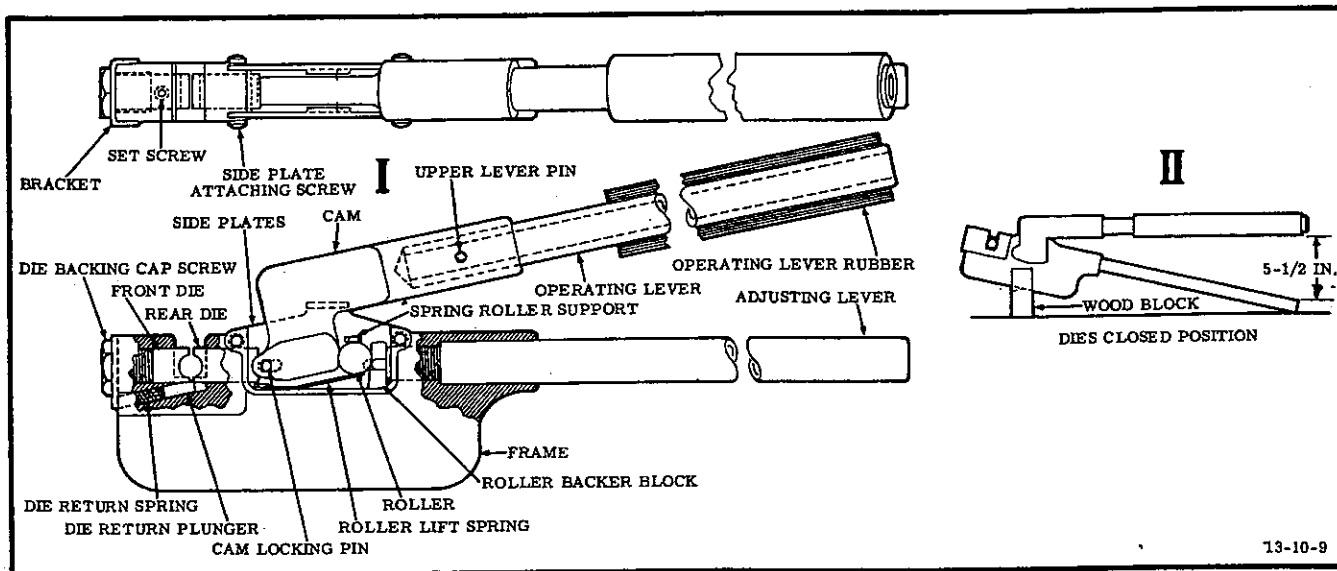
Tru-Loc Cable Terminal Swaging Machine
